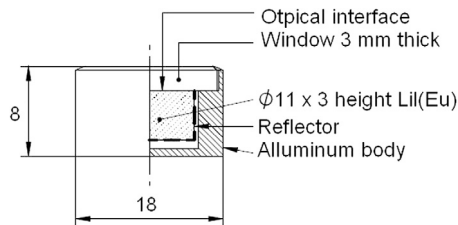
Structure of the large $^6\text{Li}(\text{Eu})$ scintillator, 11 mm diameter \times 3 mm height. All dimensions in mm. Courtesy of Scionix Holland BV.
